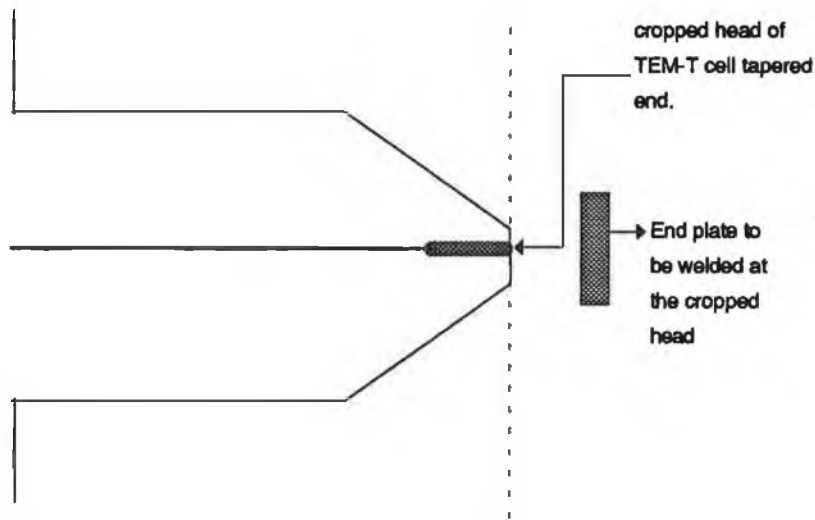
Arrangement for mounting an N-plug at the tapered end of a TEM-T cell half. The cropped head at the tapered end is shown through a dotted line at that section.
